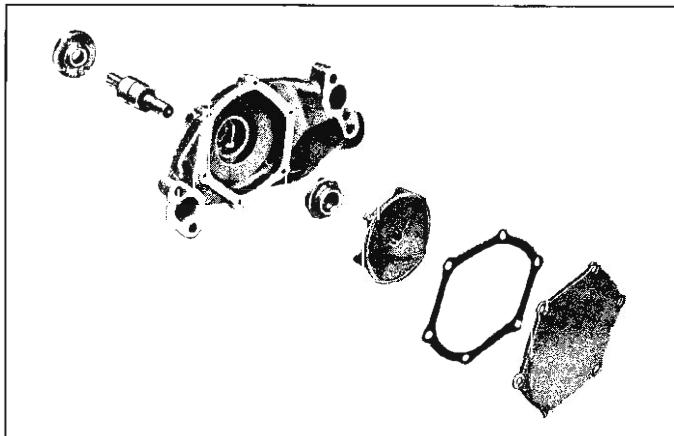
Cylinder Pump Disassembled (283 Cu. In.)
